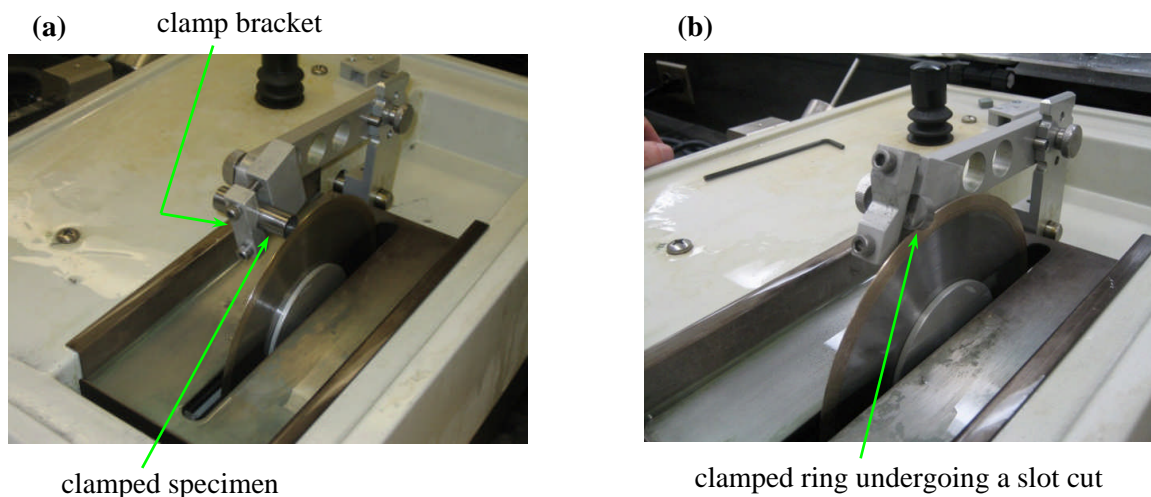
(a) Cutting a ring from a sheath tube and (b) cutting a slot in a ring
